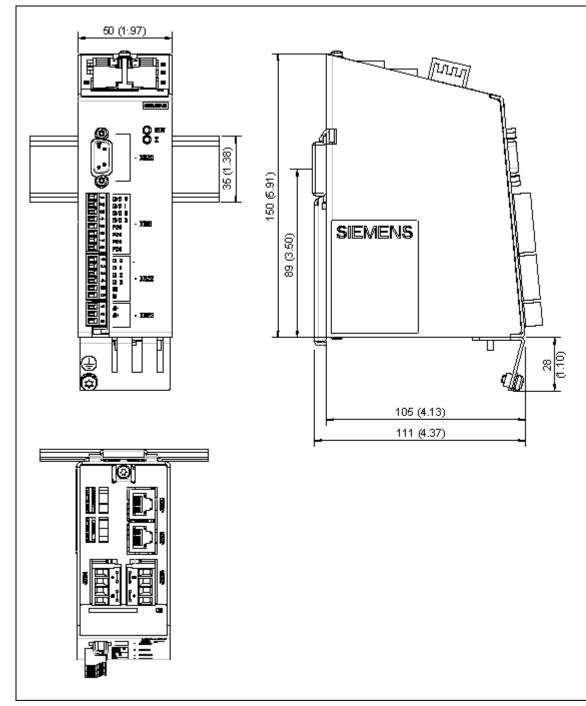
Dimension drawing TM41, Order number 6SL3055-0AA00-3PA1
